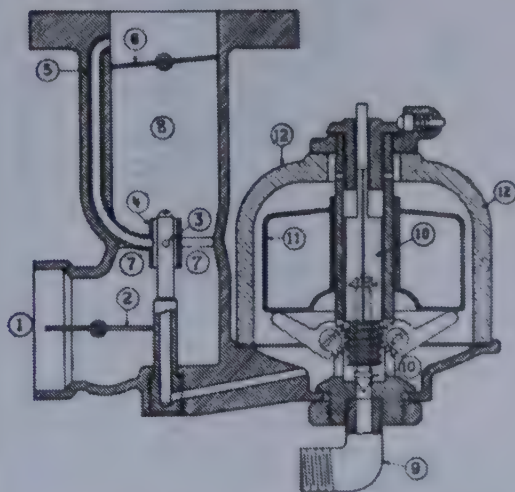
Carter Carburetor Model E. Single Jet Type showing novel By-pass around throttle and Adjustable Gravity Needle Float Mechanism.
